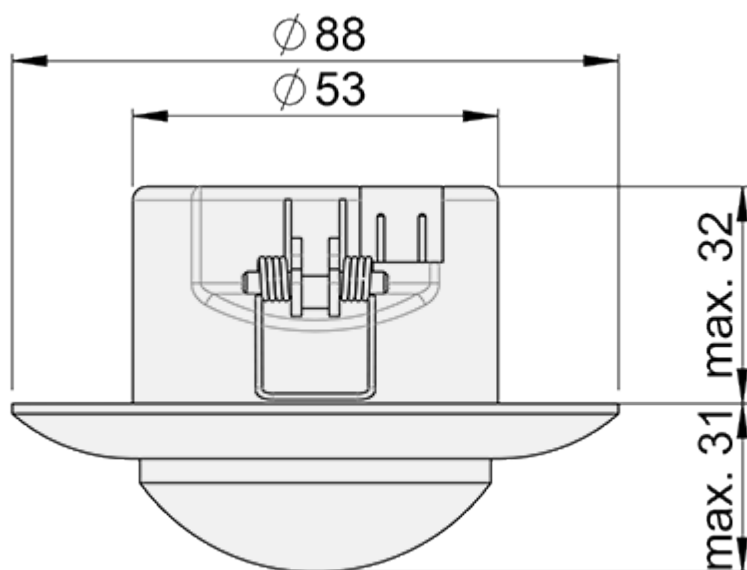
Dimensions of Halton Workplace WRA occupancy sensor
